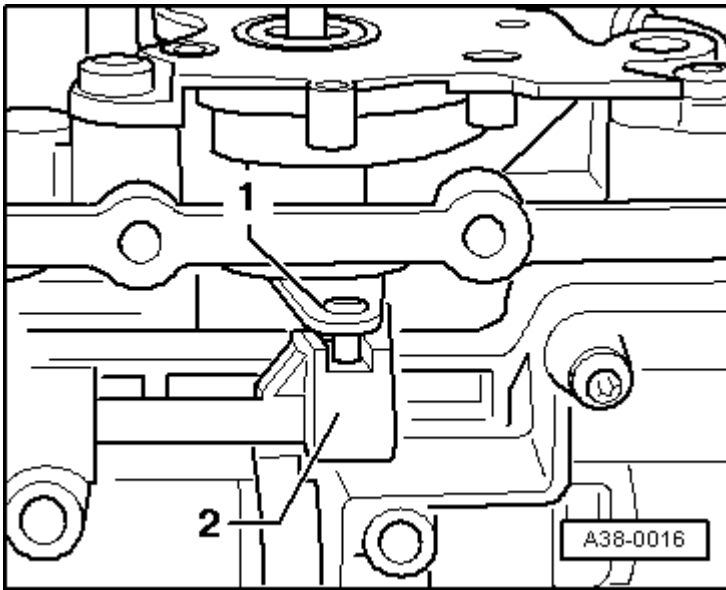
Position Valve Body On Transmission Housing While Inserting Notched Disc Pins -1- Into Selector Slide Groove -2-
